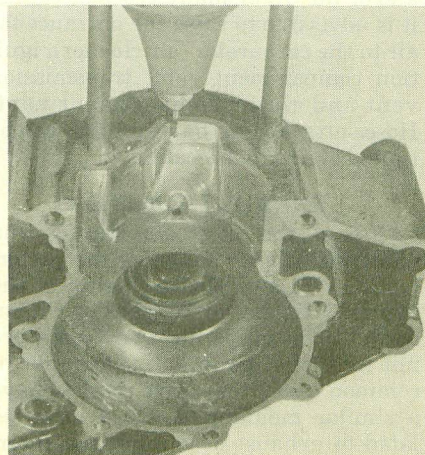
A—All bearings should be removed when correcting misalignment of passages. Make certain that all parts are completely cleaned before assembling.
